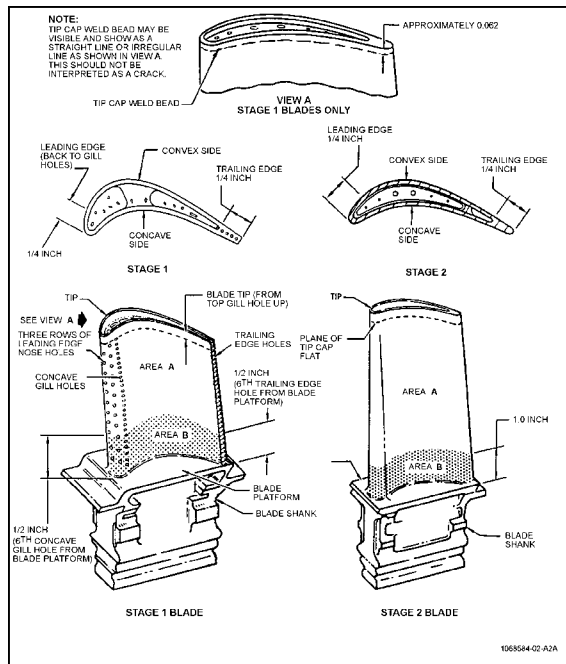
High Pressure Turbine Rotor Blades - Single Shank
